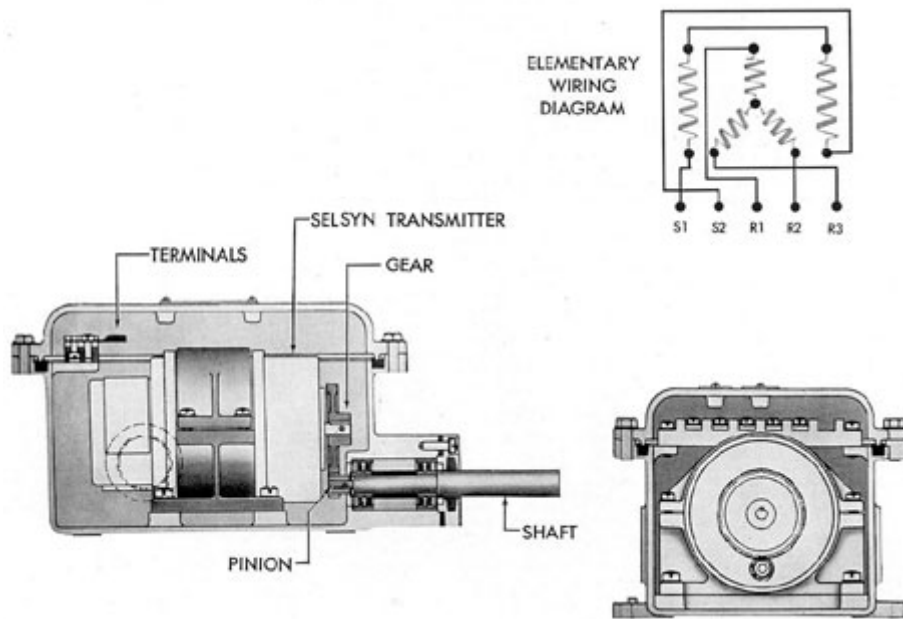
Cross-sectional view of rudder angle transmitter.
